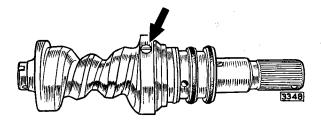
The trim screw, indicated by the arrow, must not be disturbed when dismantling the steering unit.
